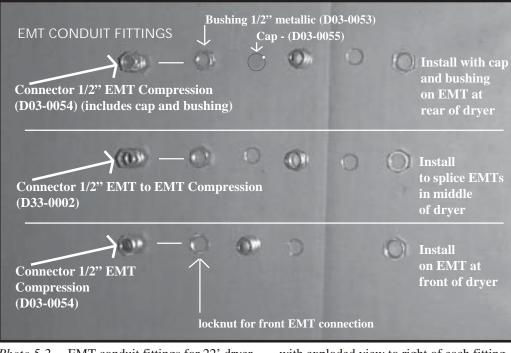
EMT conduit fittings for 22' dryer ——with exploded view to right of each fitting. *EMT = Electrical Metallic Transit.
